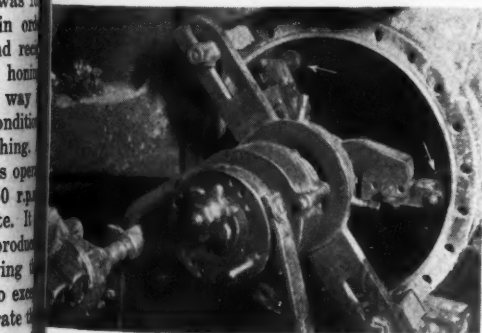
Using Steel Rollers to Burnish the Interior Surface of a Cylinder Bushing
